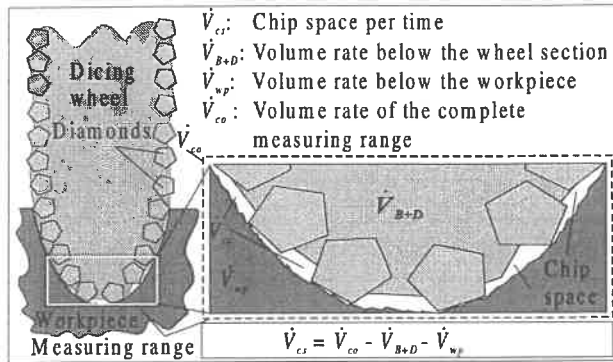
Cross section of a dicing wheel cutting a workpiece
